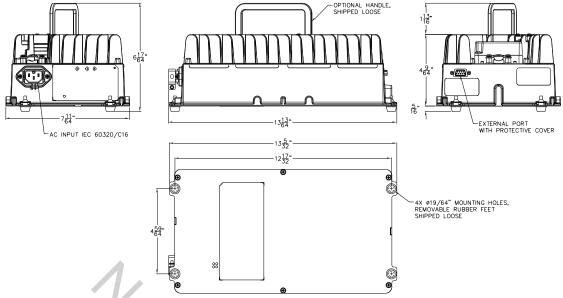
Charger Dimensions and Mounting Hole Locations
